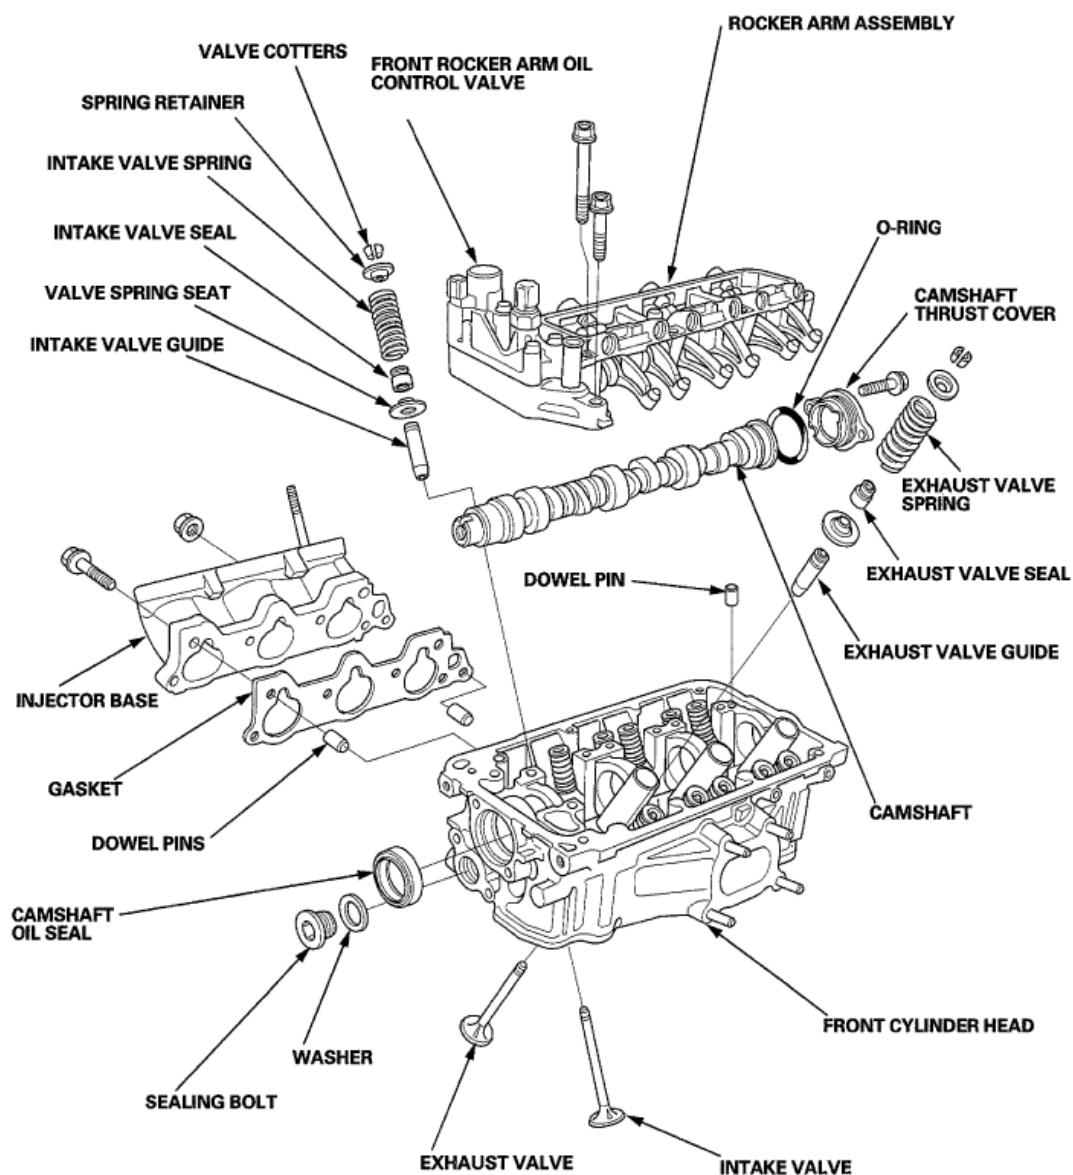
Identifying Cylinder Head Replacement Components Locations (FRONT)
